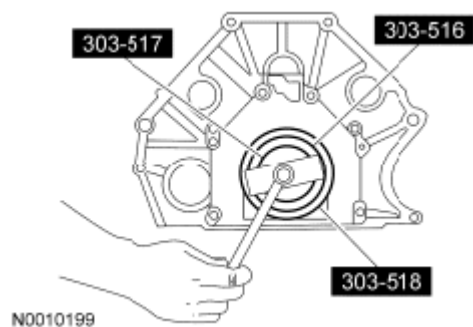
Identifying Crankshaft Rear Seal Installers And Crankshaft Rear Oil Slinger Installer
